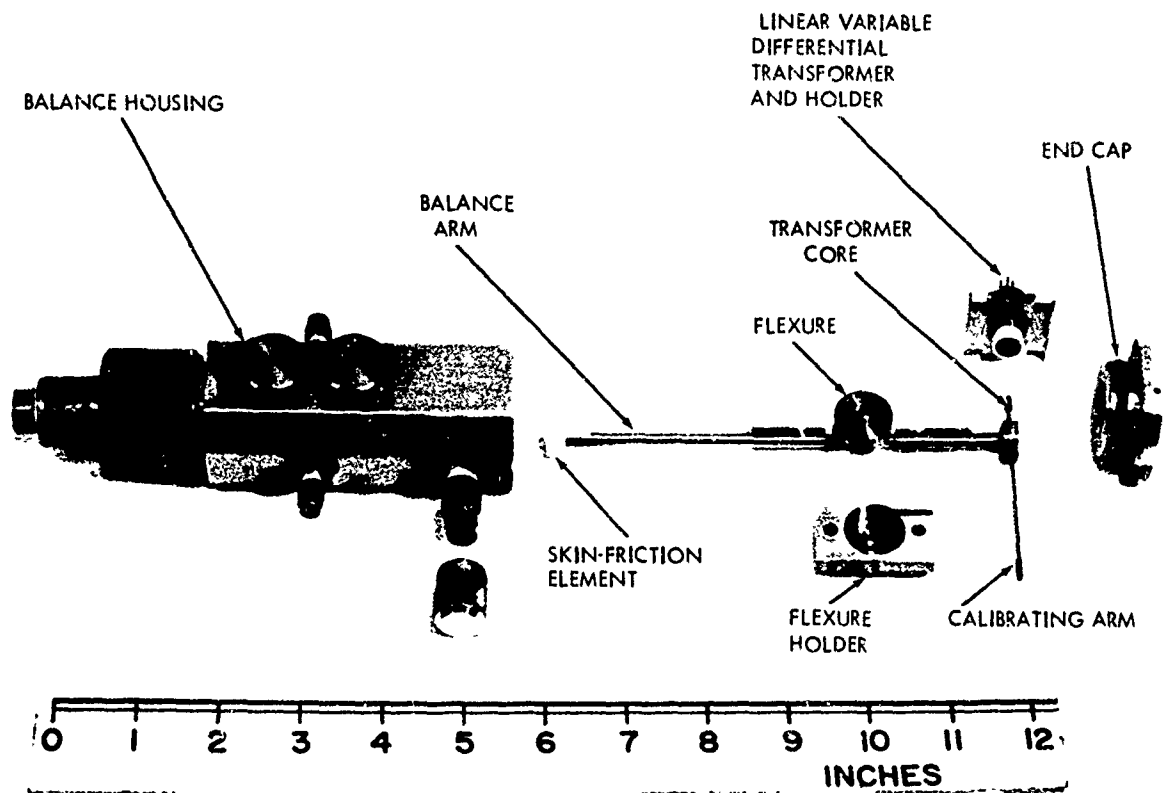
EXPLODED VIEW OF SKIN FRICTION BALANCE
